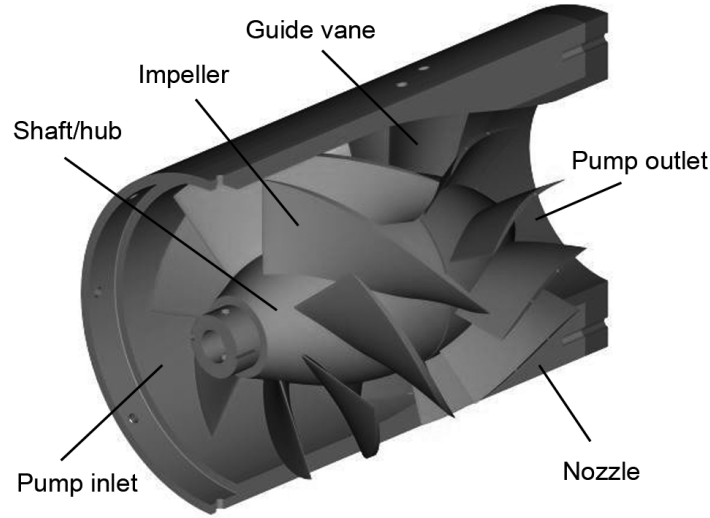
3D representation of a typical stock waterjet showing guide vanes (stator), impeller, waterjet nozzle, shaft/hub, and pump inlet and nozzle (outlet).
